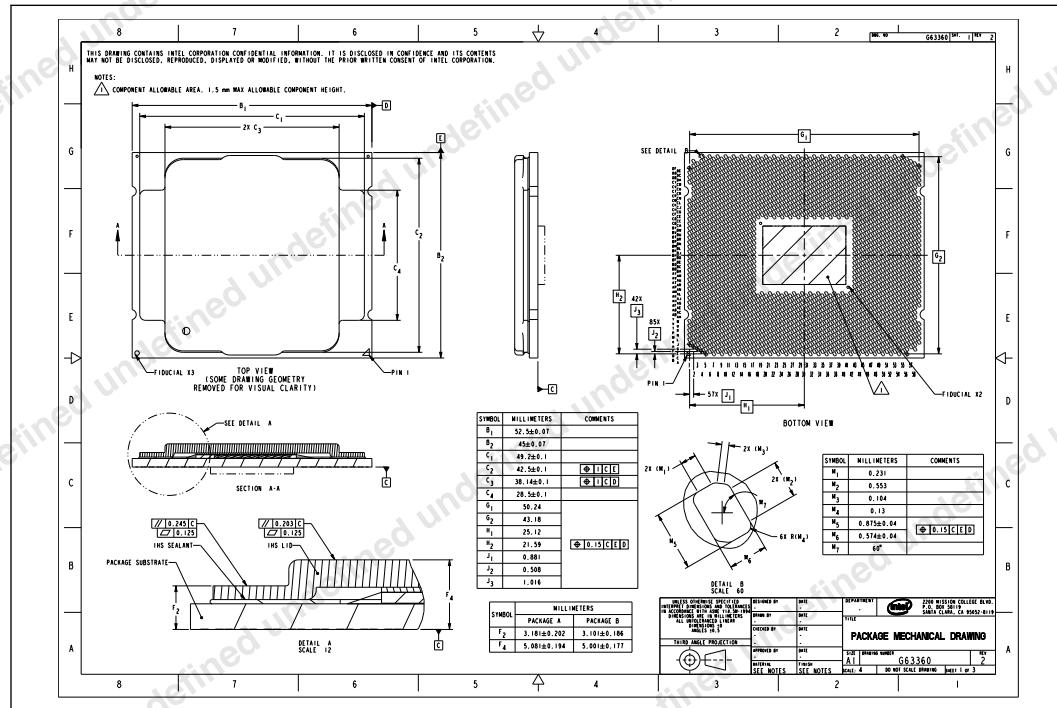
Intel® Xeon® Processor v3 Product Families Large Package Mechanical Drawing Page 2
